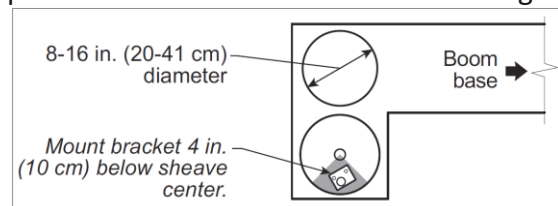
Anti-two-block switch placement for live end mounting on a lattice boom
